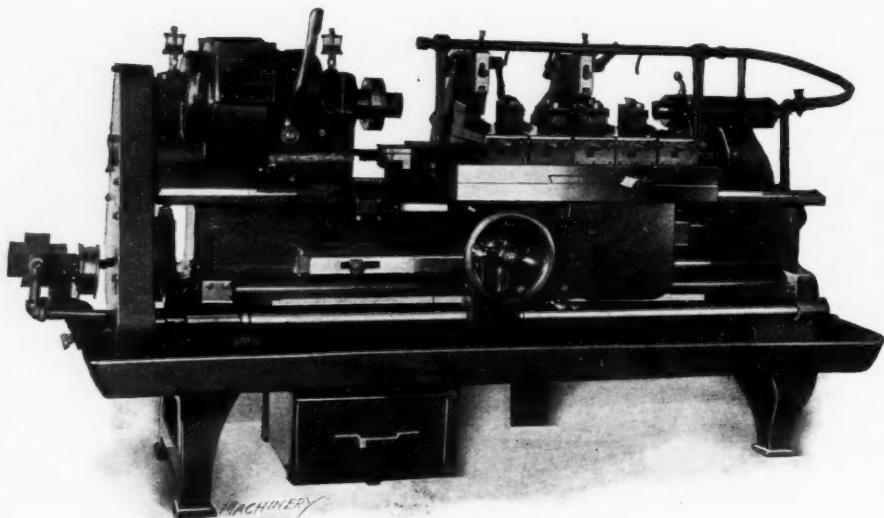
Multiple-tool Rifle Barrel Turning Machine
